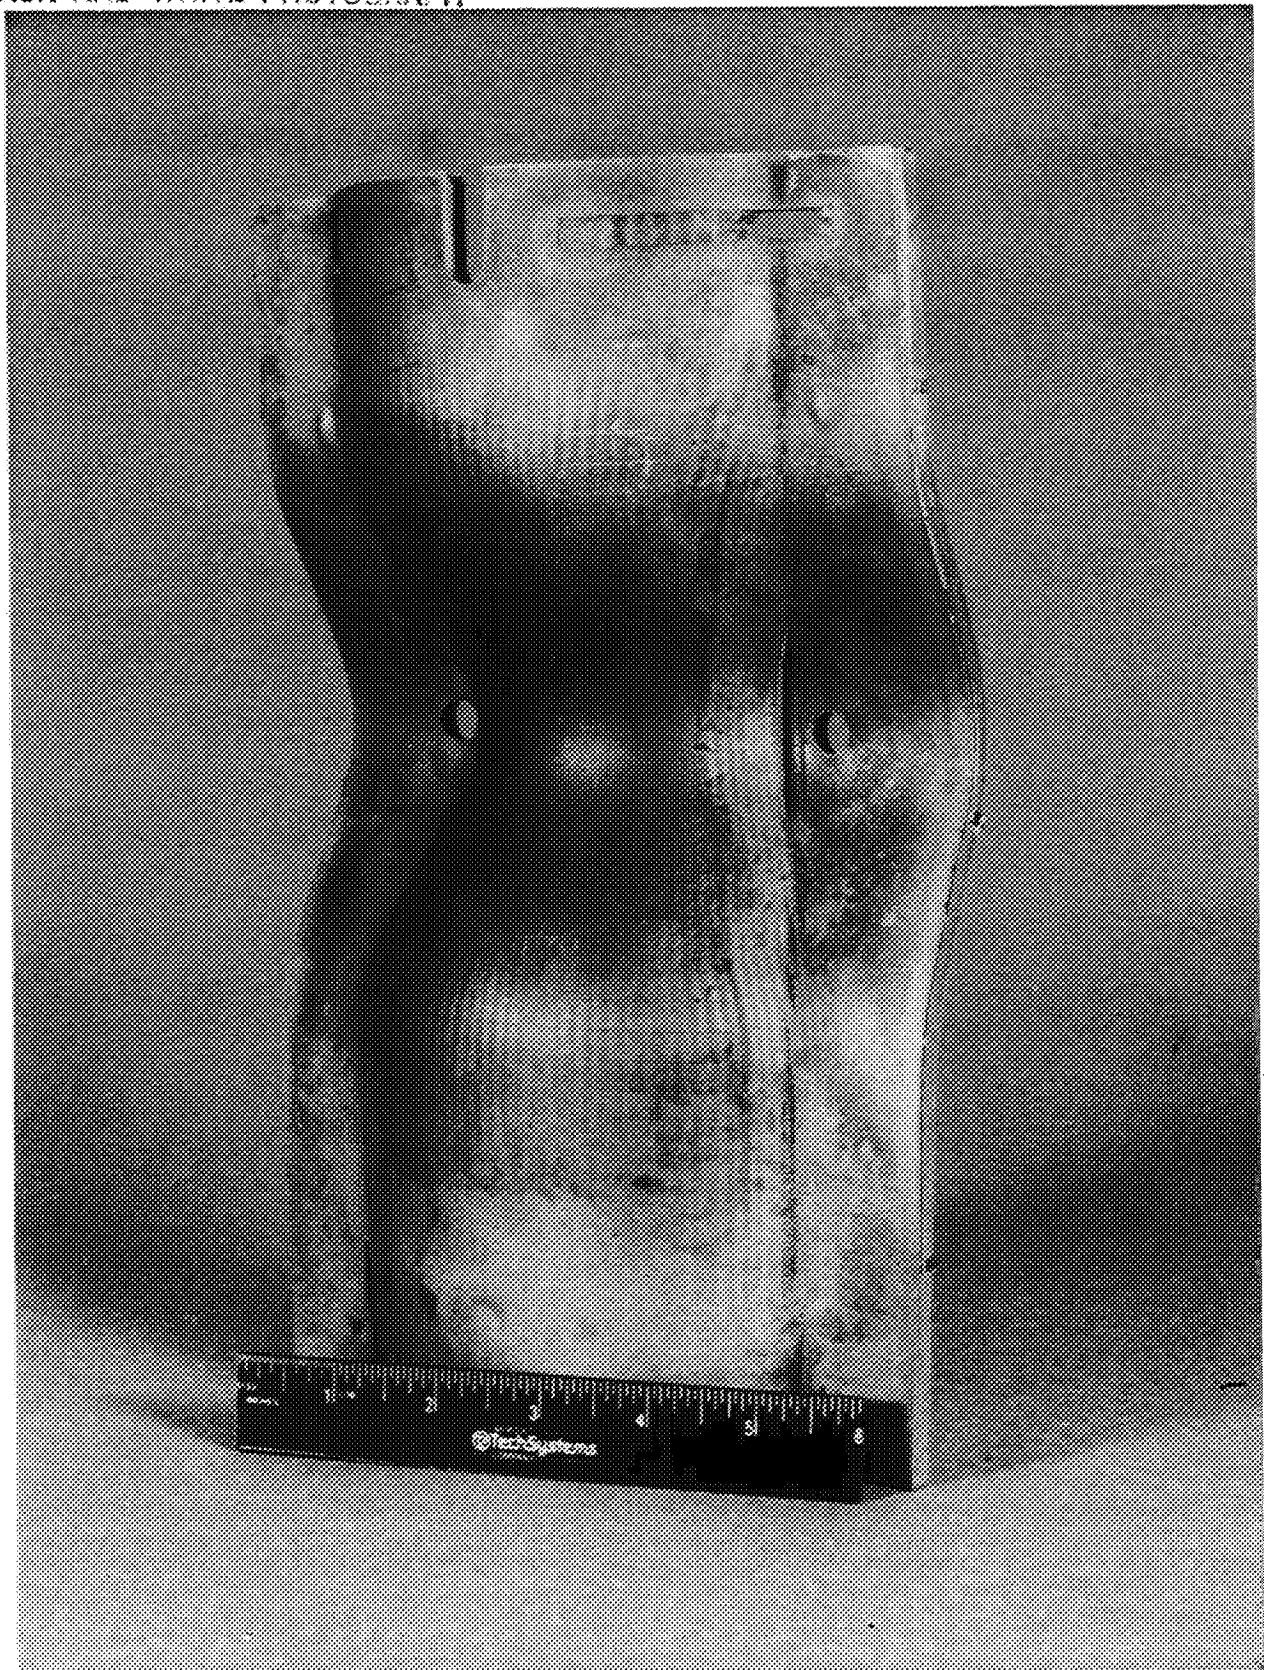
Removing Throat Springs From the Die Eliminated Cracking of Part SN 002
